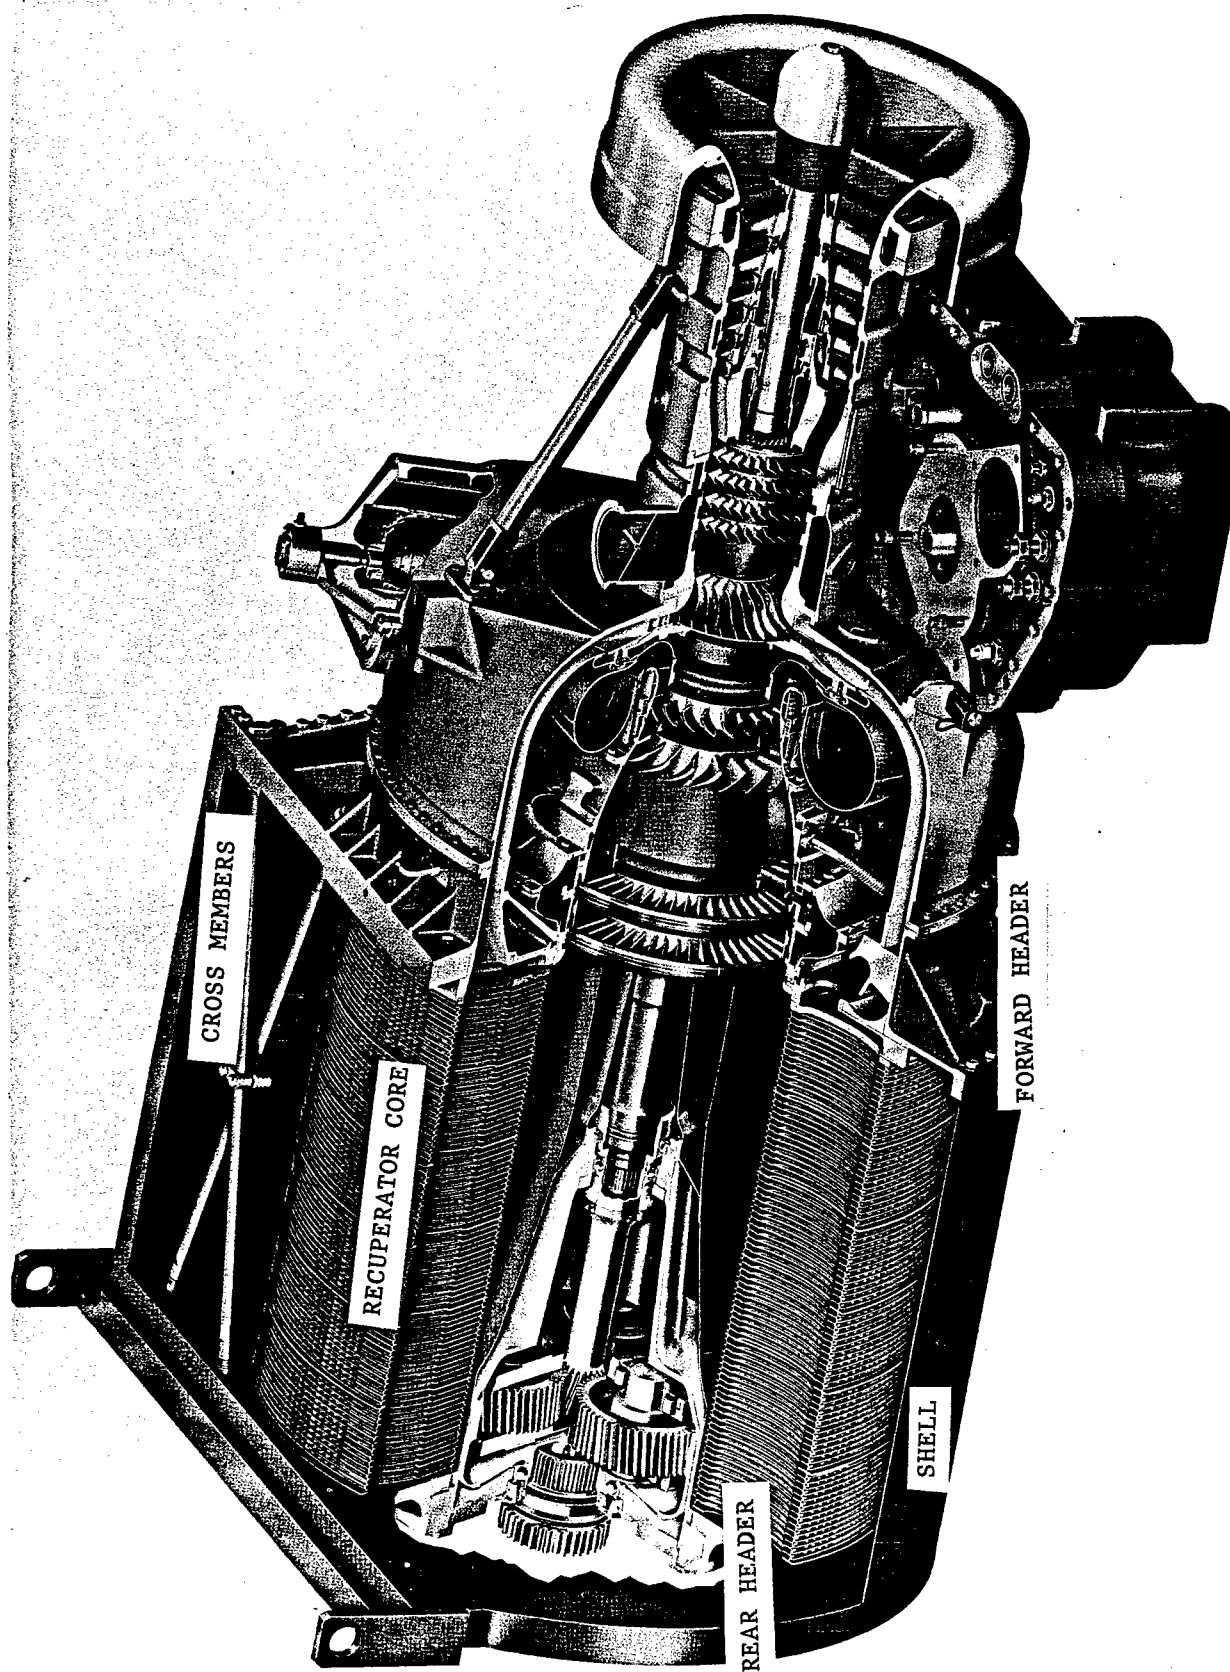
AGT 1500 Engine-Complete Recuperator Assembly
